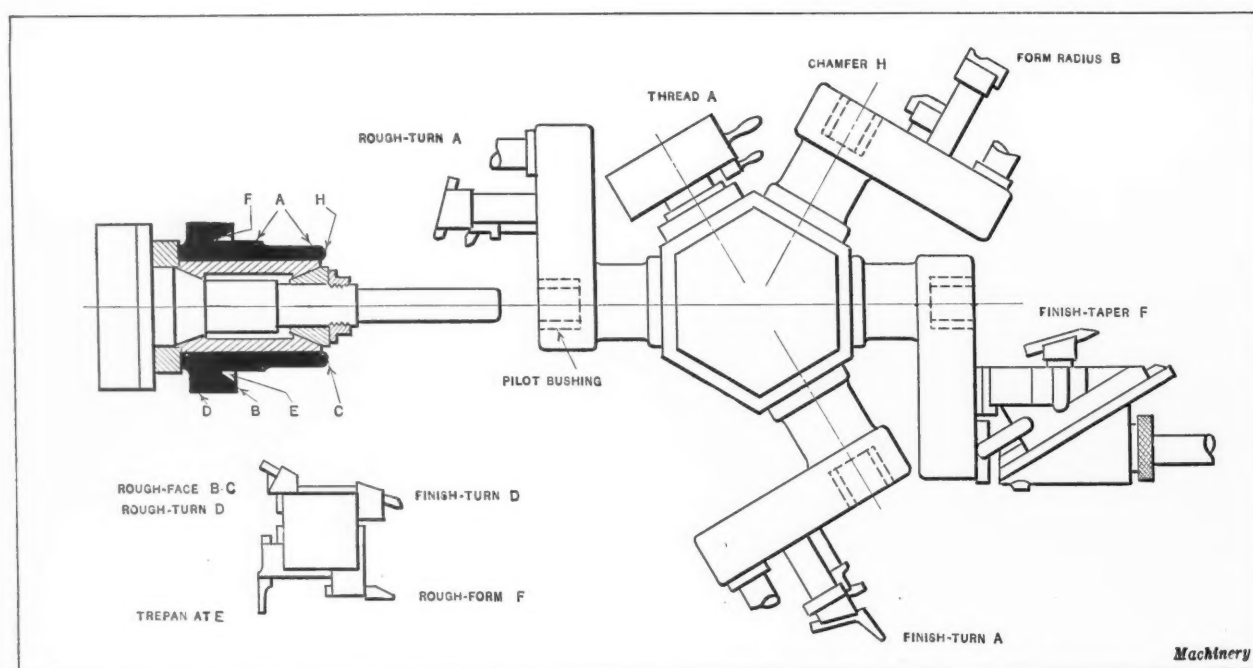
Lay-out of Tooling Equipment for finishing Thirteen Different Sizes of the Commutator Spiders illustrated in Fig. 1
